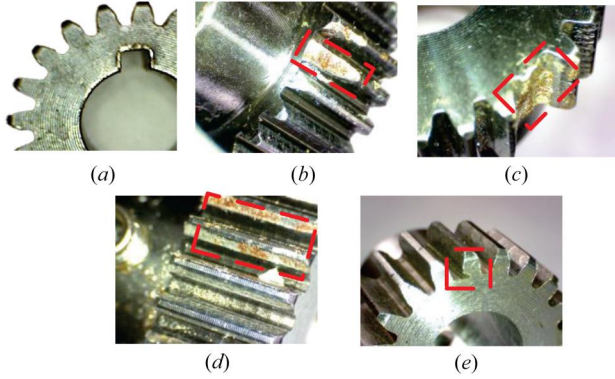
The planetary gearbox exhibits various defect modes, including (a) sun gear with an intact tooth, (b) sun gear with a surface wear tooth, (c) sun gear with a crack tooth, (d) sun gear with a chipped tooth, and (e) sun gear with a missing tooth
